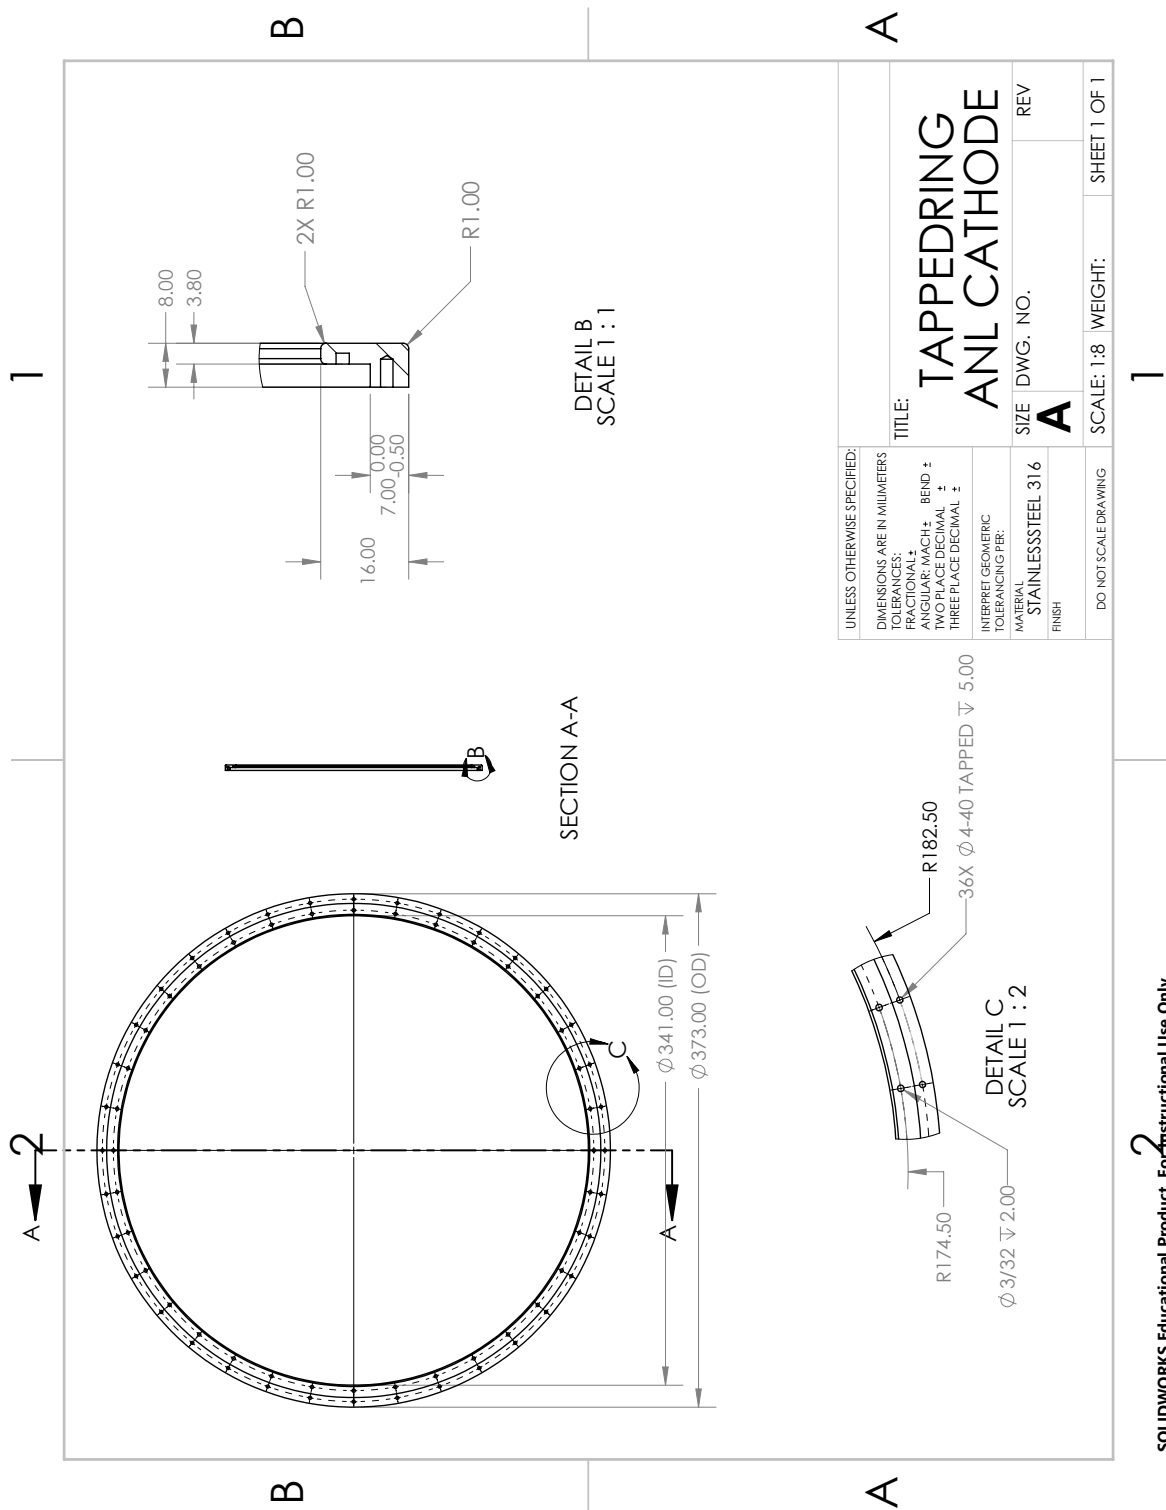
Machine drawings for manufacturing the Cathode Base rings.
